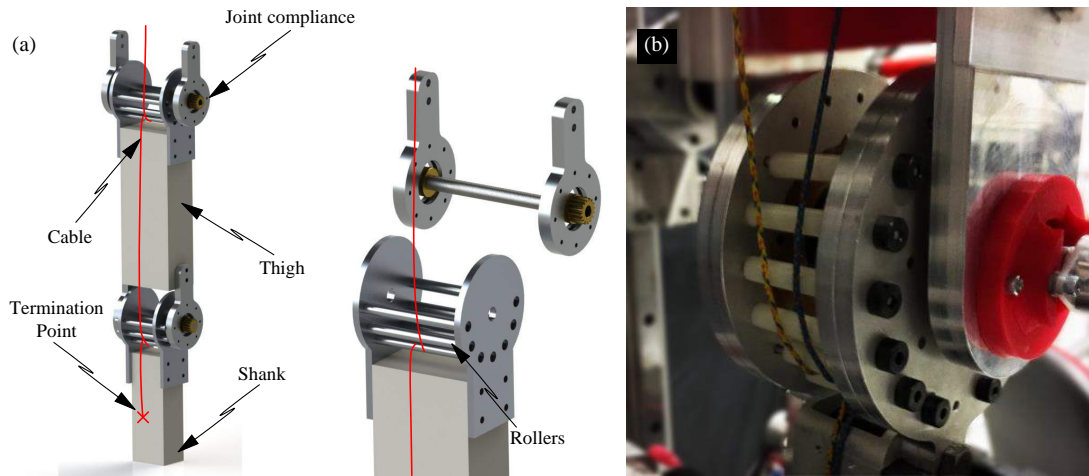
RNL3 joint design. a) Schematic and exploded view. b) Hardware implementation.
